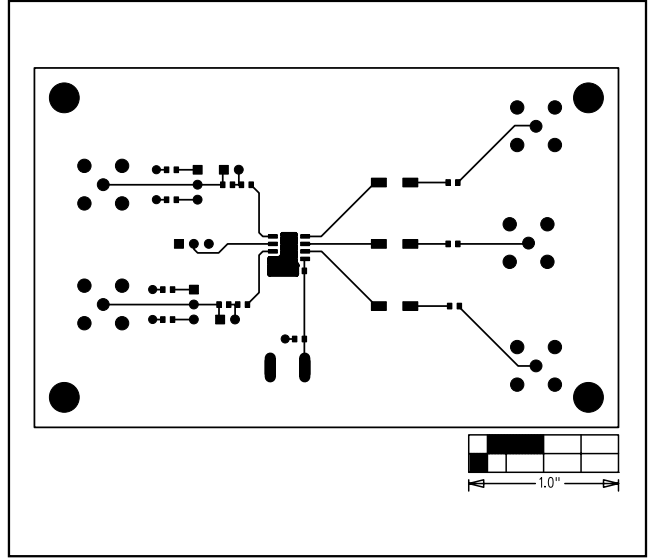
MAX7443 EV Kit PCB Layout—Component Side
